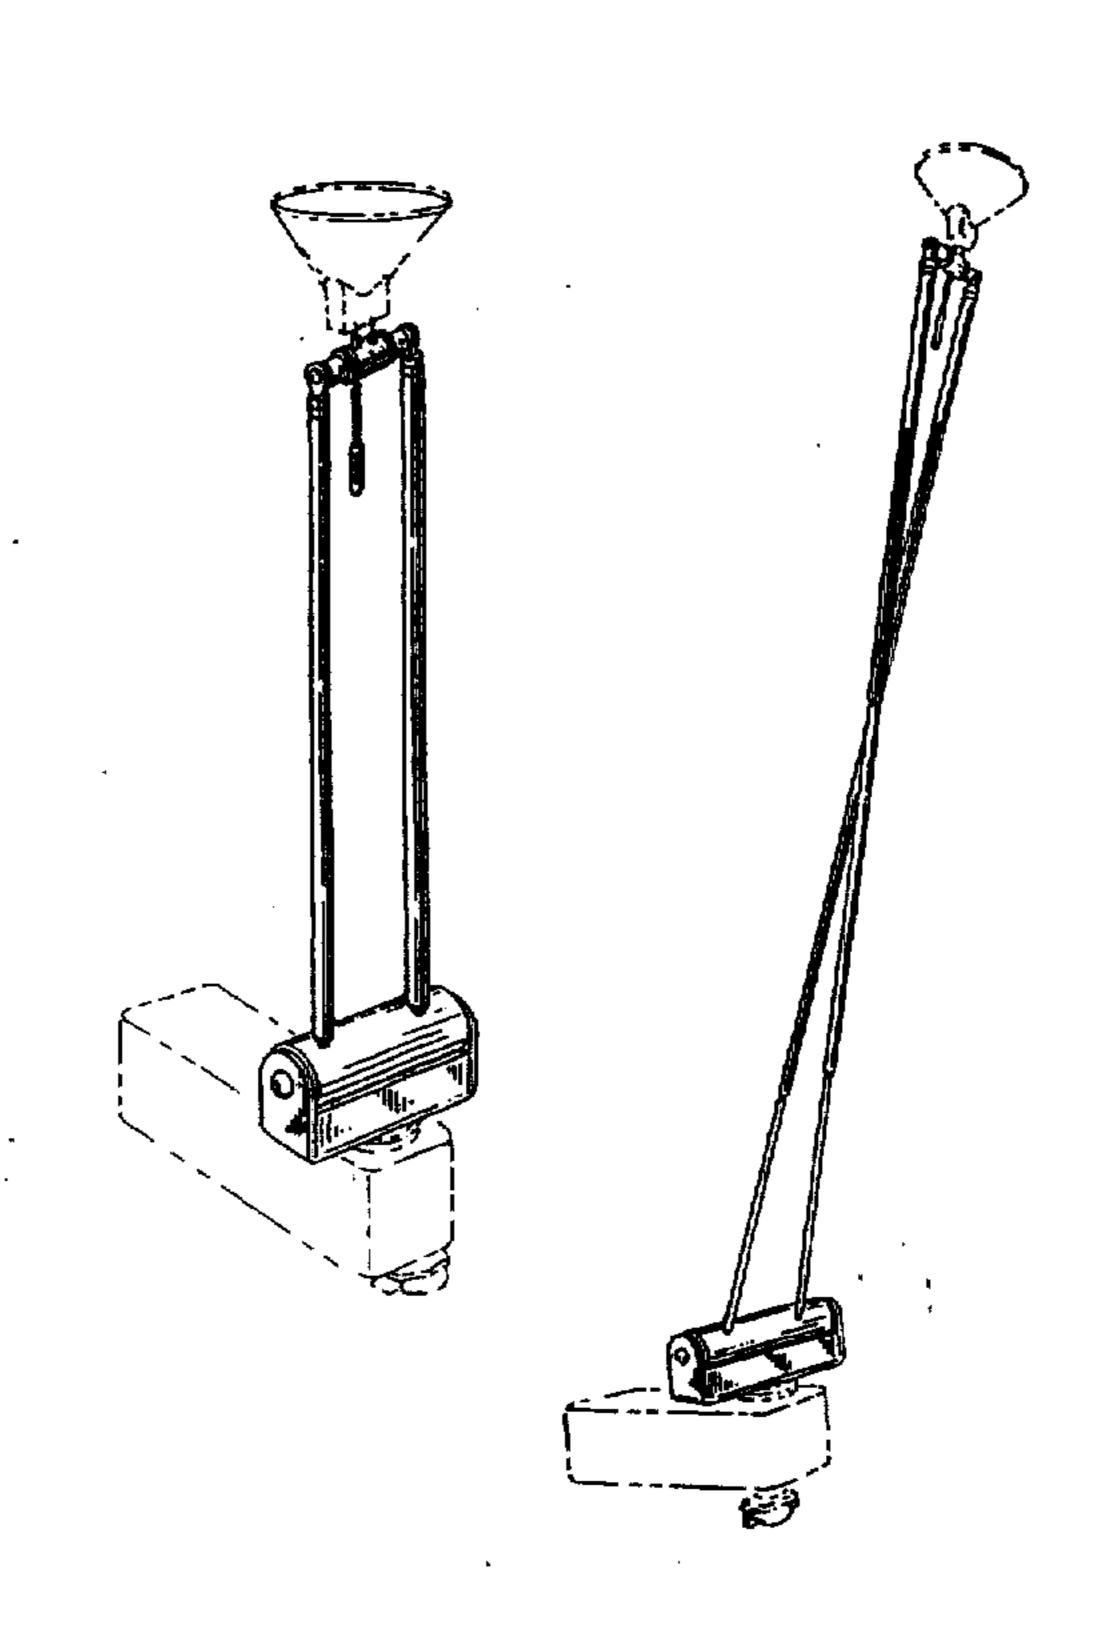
is a right side view of the adjustable support arm for a lighting fixture taken from the perspective of FIG. 2
